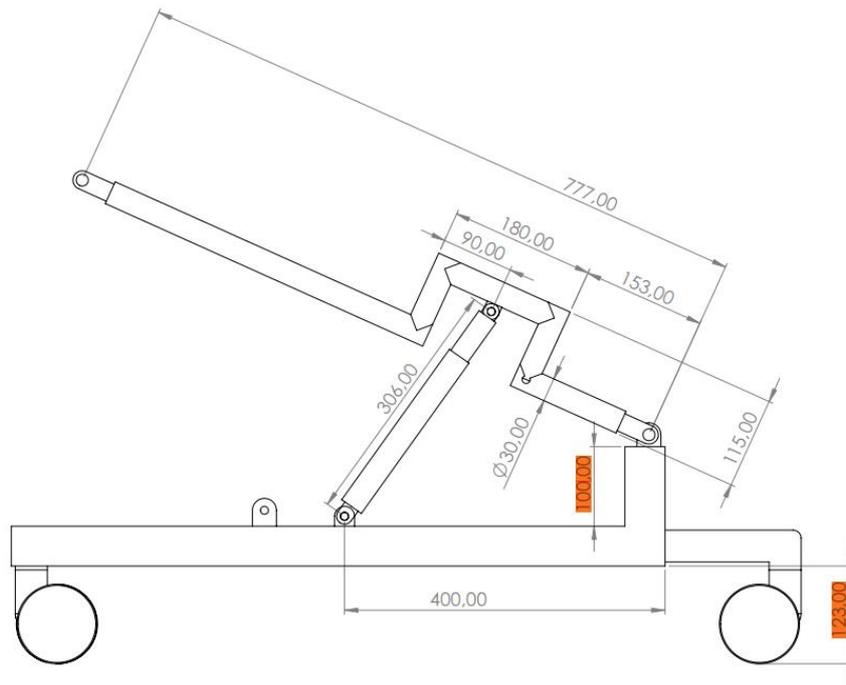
Redesign of prototype CAD drawings to accommodate longer linear actuator.
